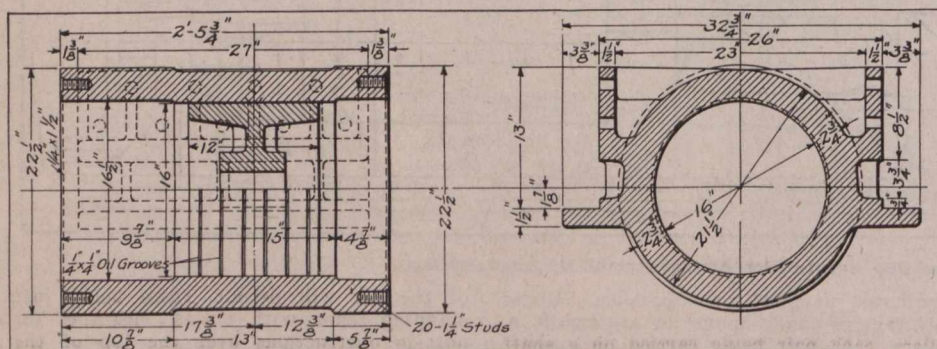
Oil Draft Cylinder of Dynamometer Car.
